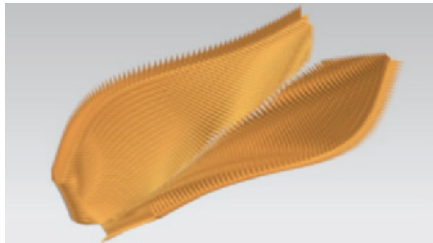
Normal vectors at cutter contacts in worm wheel tooth flank.
